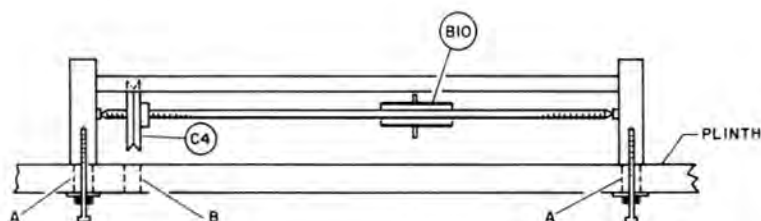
Rotation of the pulley wheel drives the coupler and the carriage down the lead screw at a rate determined by the servo loop.
